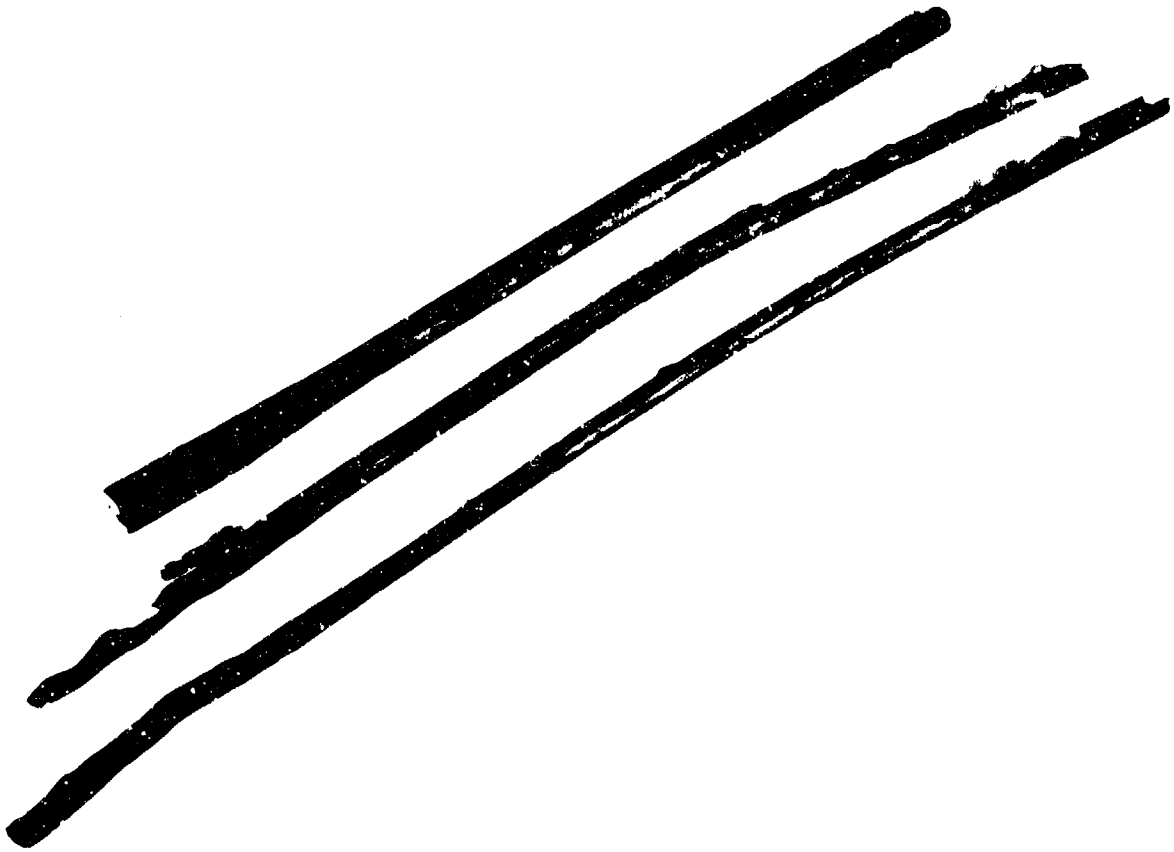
Cracked filled billet extrusion of the cobalt base alloy.
